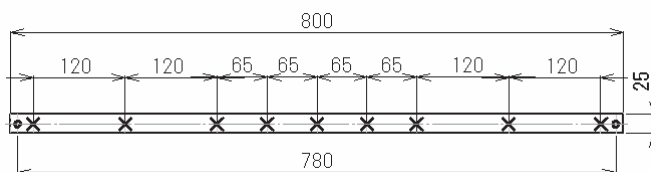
Beam-type specimen used in bending test and position where PVDF film gauges were placed.
